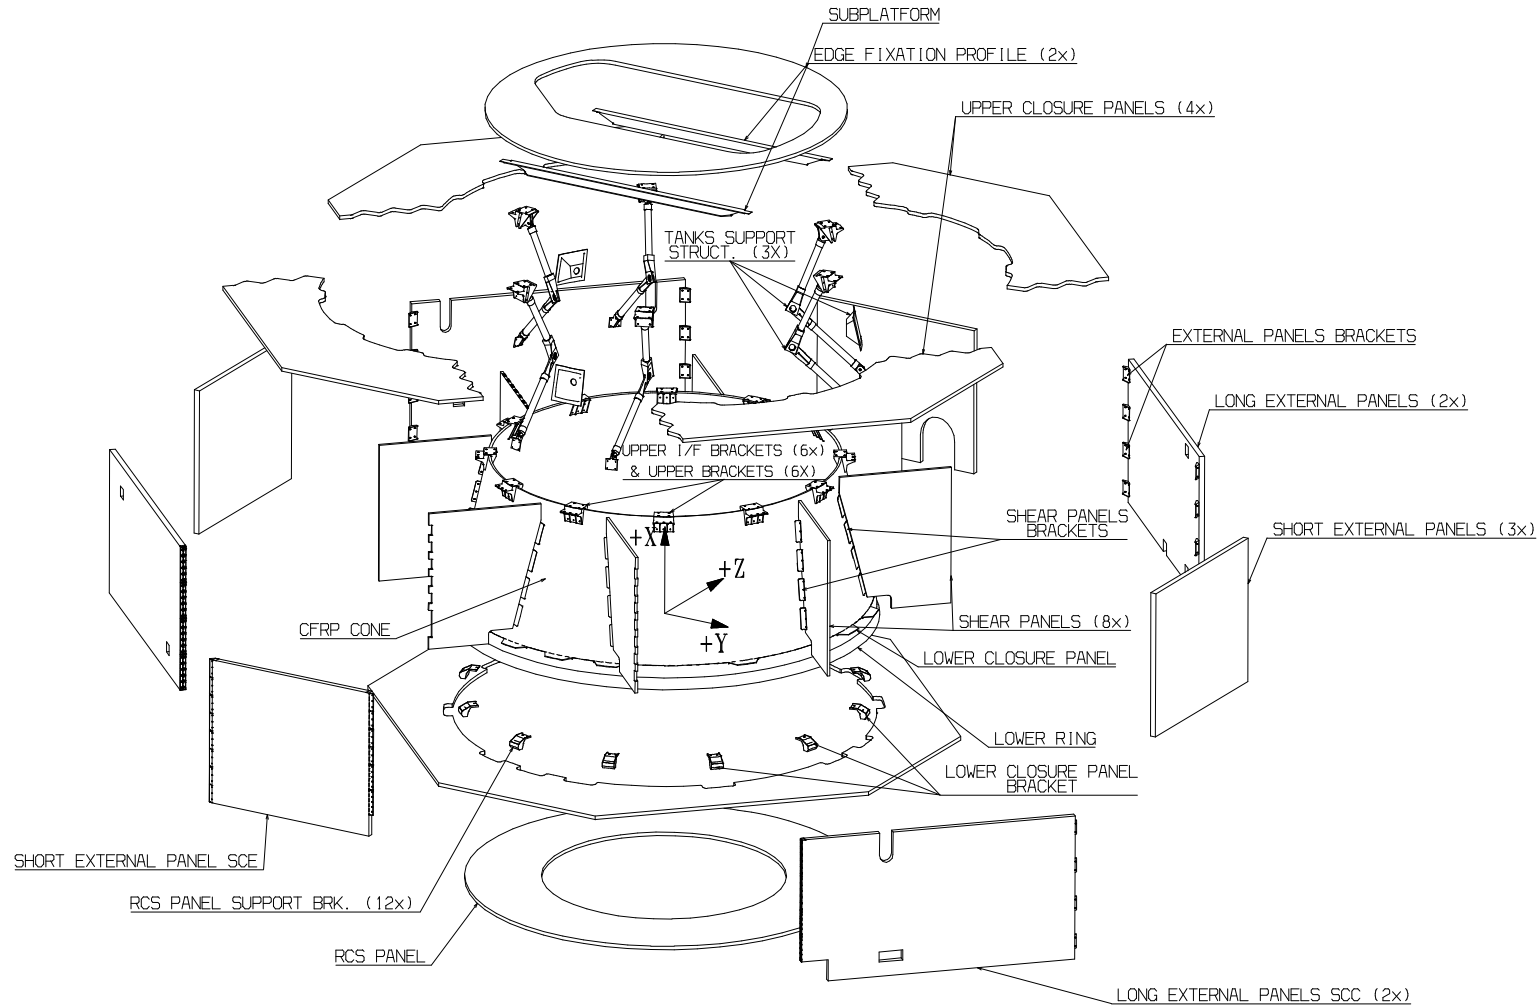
Exploded view of Planck SVM Structure
